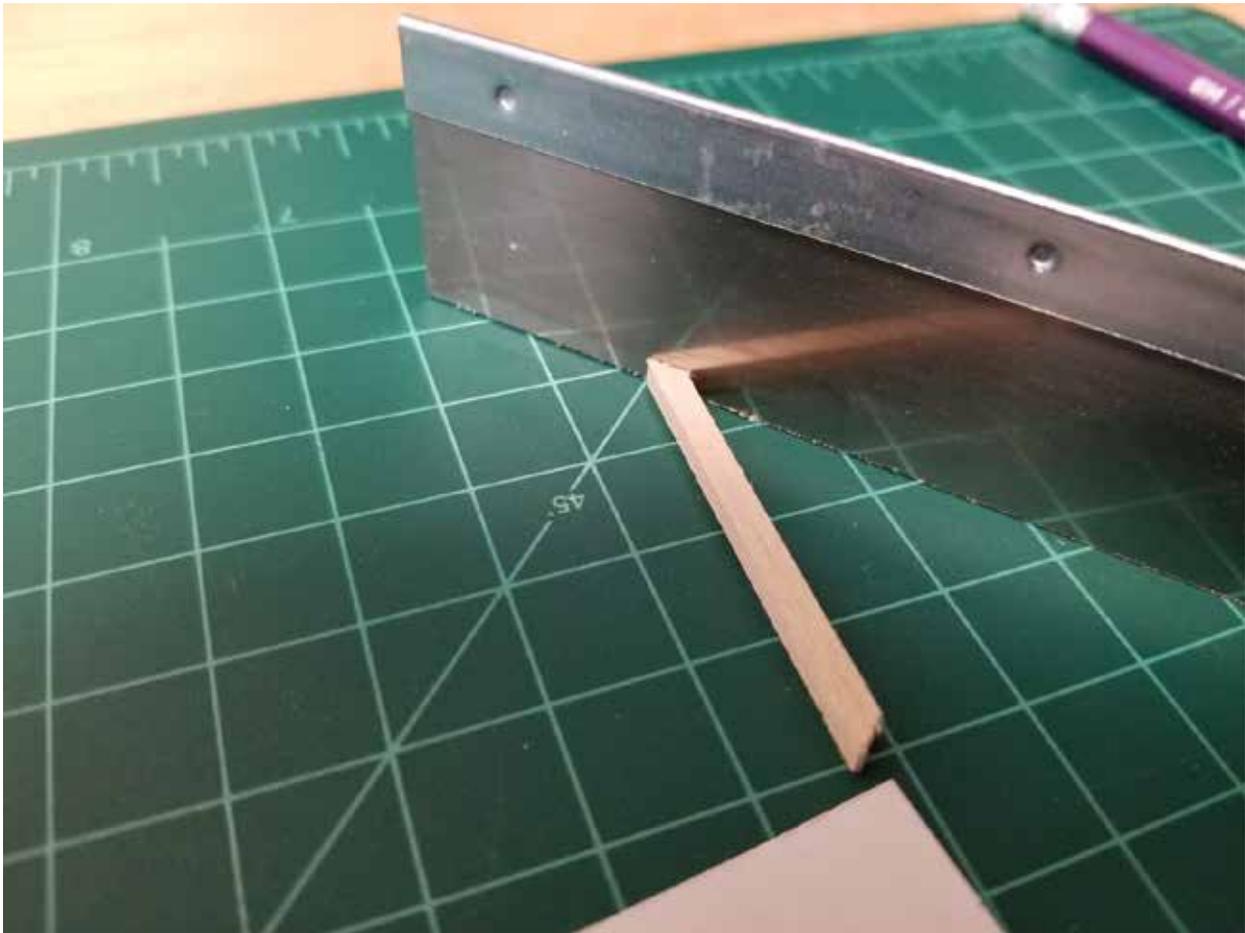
Adjusting the cut angle using the saw body as a mirror
